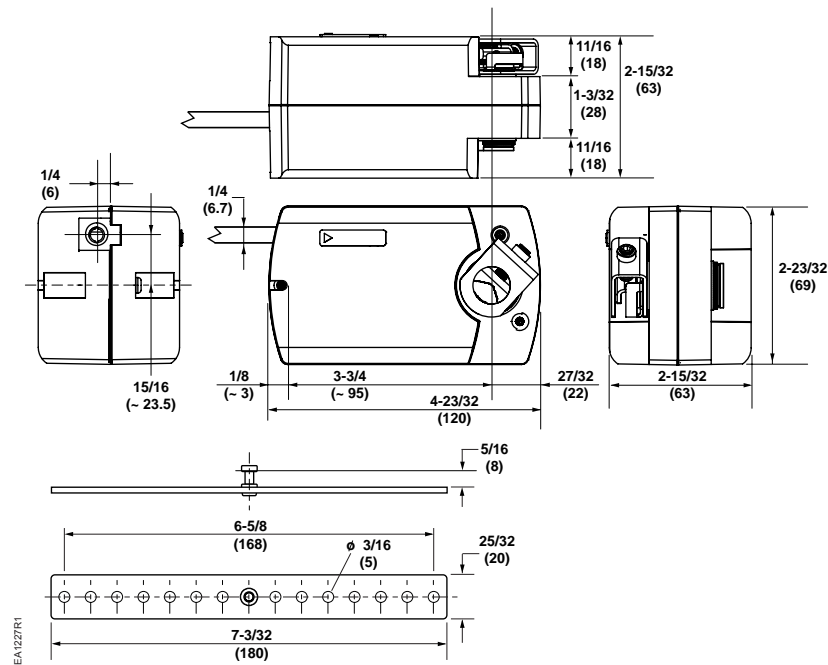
GQD Actuator and Mounting Bracket Dimensions in Inches (Millimeters).
